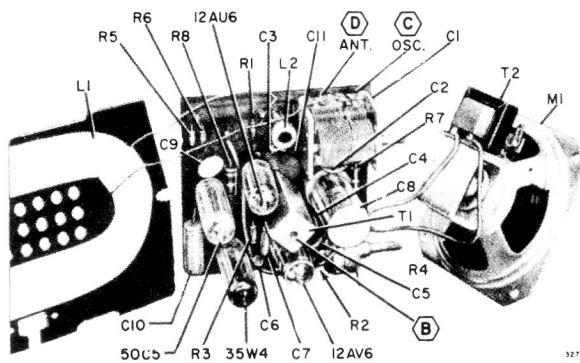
Top View of Chassis Showing Location of Components and Alignment Points.
